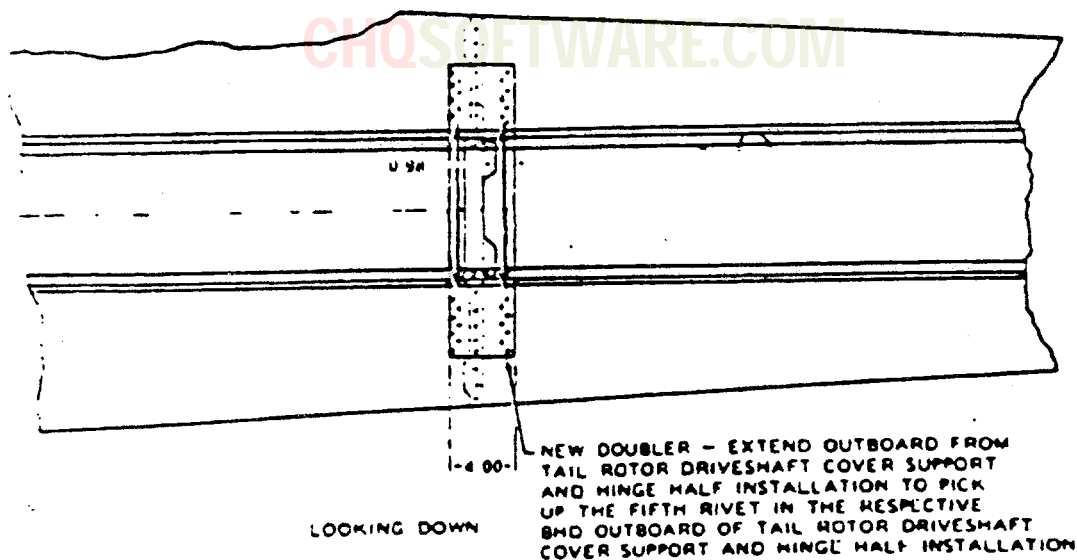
DAMAGED HANGER BEARING SUPPORT HOLES (Sheet 2 of 2)
